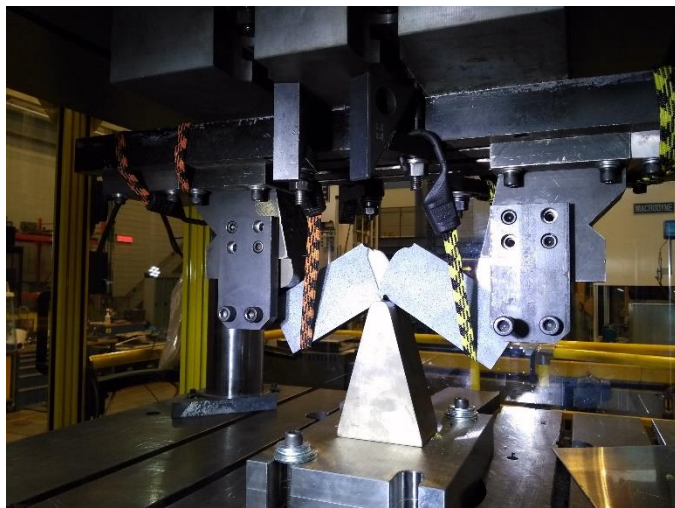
Loading fixture in a 110-ton press for intermediate-rate testing and the tested specimen fractured in slant mode
